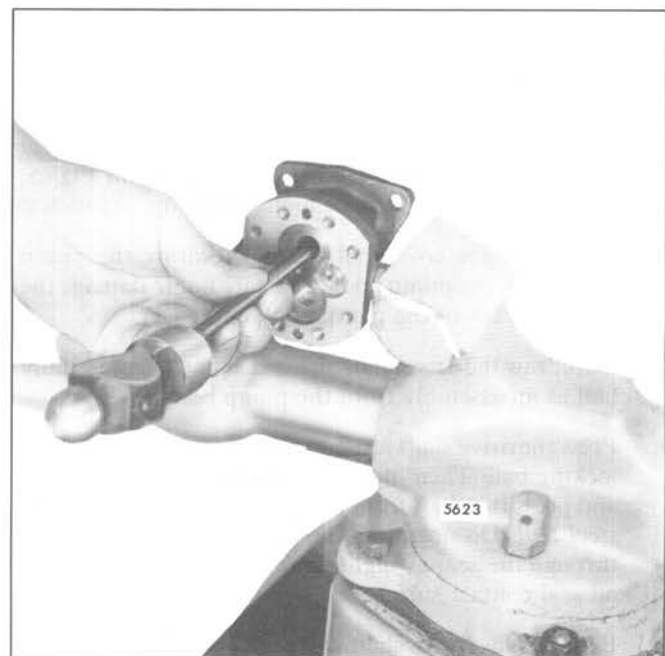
Removing Oil Seals using Tool J 1508-13
